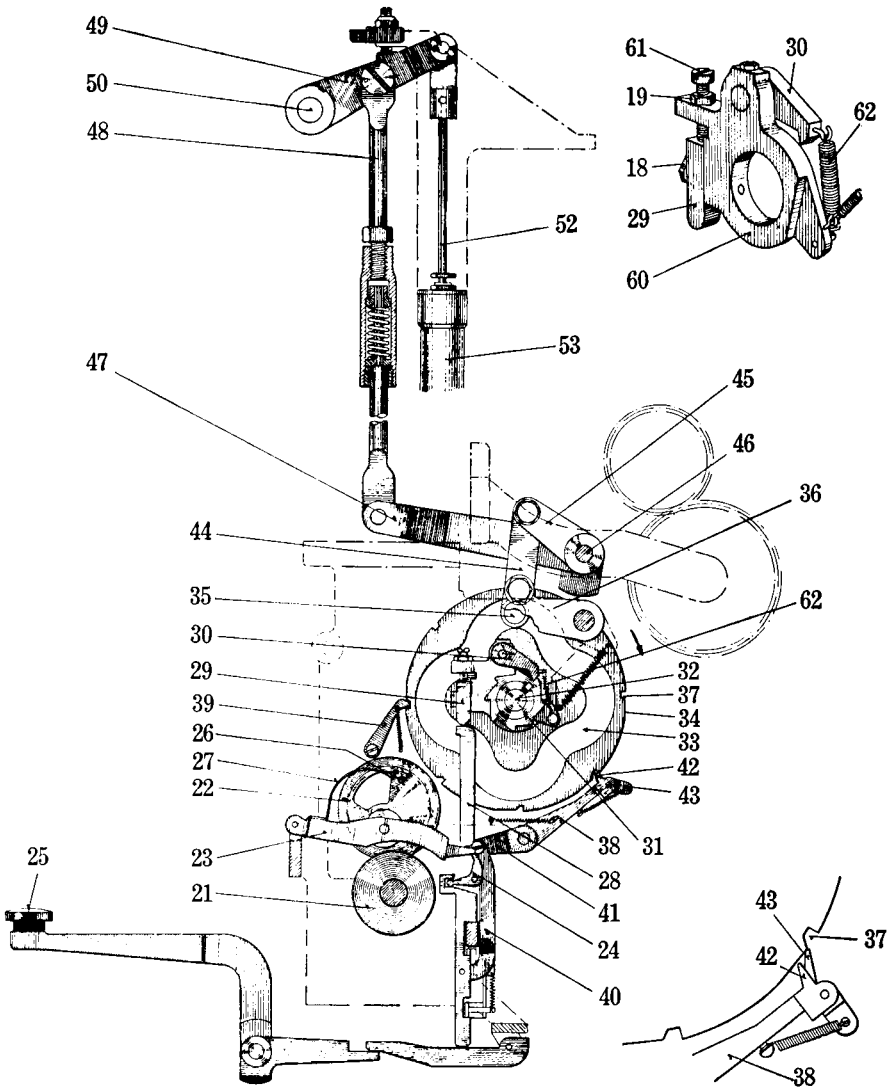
Side view of "Main" Quick Mixing Finger Key and the mechanism which is set in motion by depression of that key. This mechanism consists of a continuously rotating roller 21, and a cam 22 eccentrically mounted in a yoke 23 which is pivoted at one end and normally held, by a trigger 24 under its free end, in a position in which the cam 22 is above and out of contact with the continuously rotating roller 21 having around it a V-shaped groove into which the V-shaped periphery of the cam 22 is adapted to engage. When the trigger 24 is actuated, by the depression of the finger key 25, to release the yoke 23, the latter falls by gravity and the cam 22 is rotated by contact with the roller 21 thus raising the yoke 23, during which action (the finger key 25 having been released) the trigger 24 returns to position to support the yoke 23 and the cam 22 is brought to rest out of engagement with the roller 21 by the laterally projecting pin 26 in contact with the stop spring 27.
